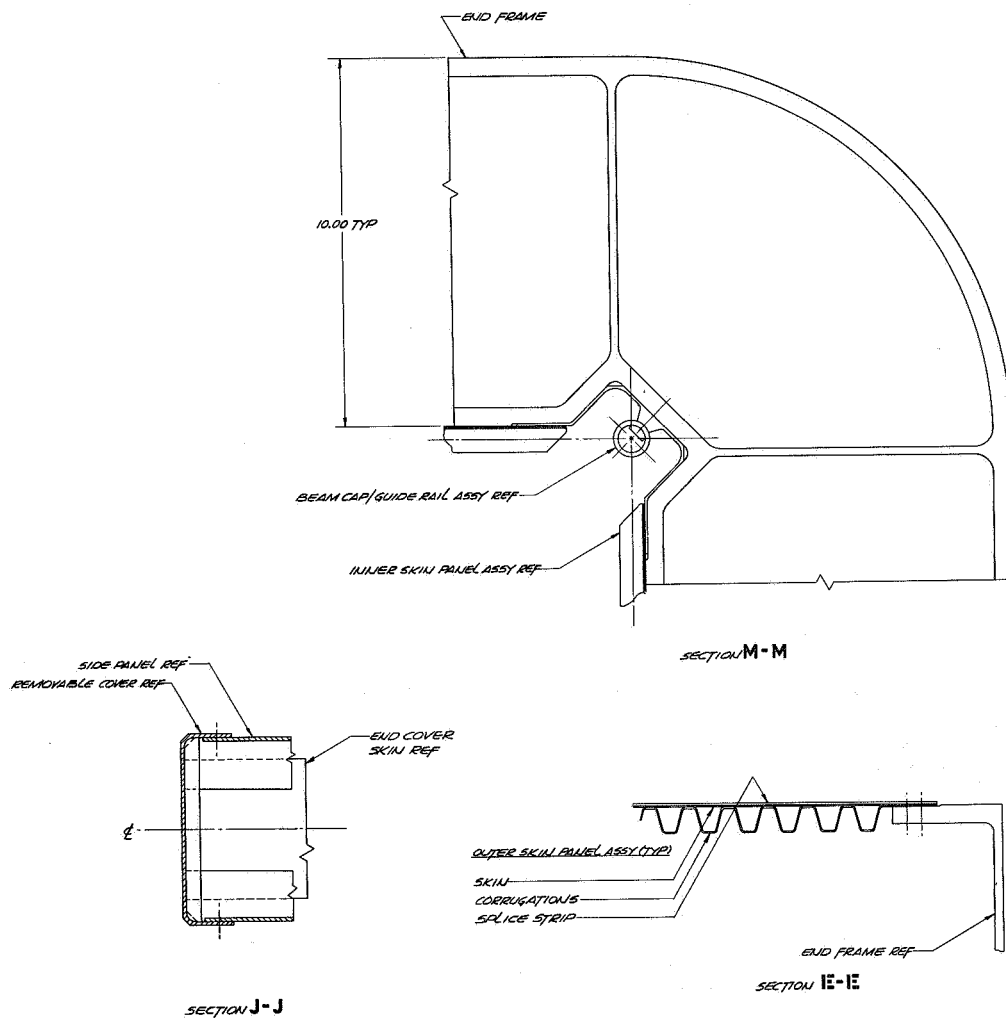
Main Rotational Frame and Arm/Counterweight Drive Structural Assembly.
